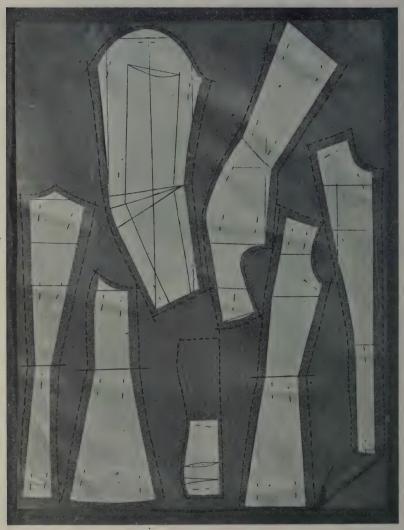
Drafted pattern placed on material for cutting out, showing marks for seam allowance.
